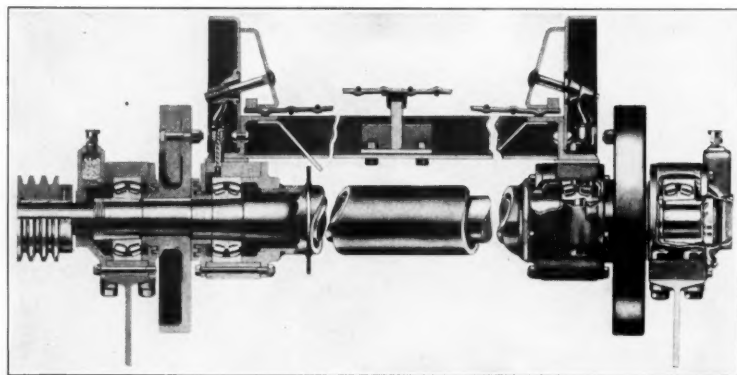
Cross section through the vibrator mechanism of a Link-Belt heavy-duty positive drive vibrating screen showing oil cups for bearing lubrication.
